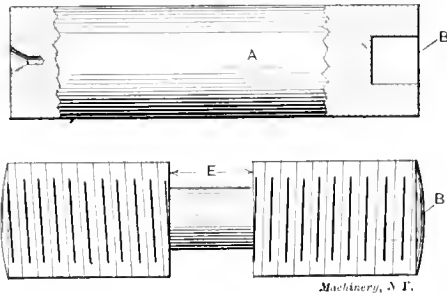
Two Views of the Partly Finished Chuck Screw.
